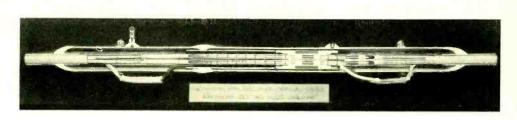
Cross-section of gas plug used for sectionalizing the cable
